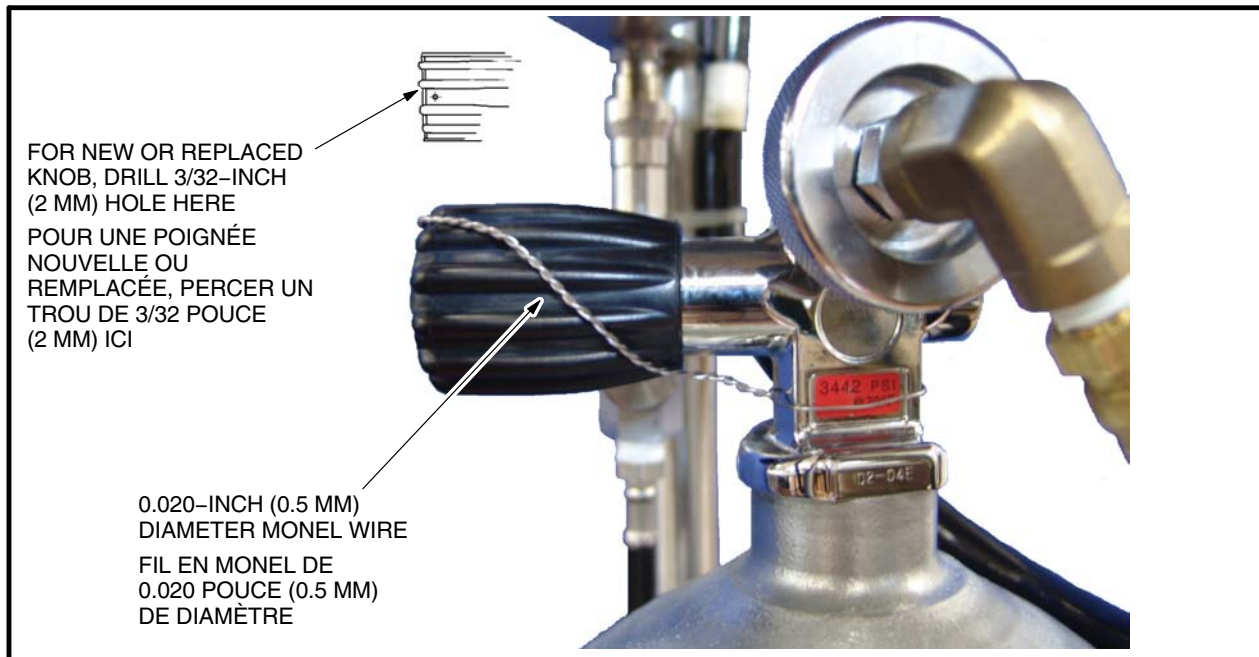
PRS Cylinder Supply Valve Knob Lockwired
